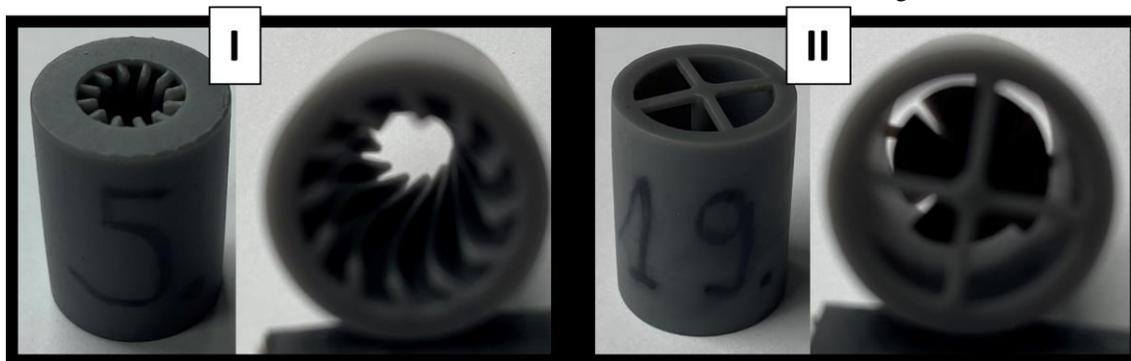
3D printed nozzles for reciprocating compressor manifold
